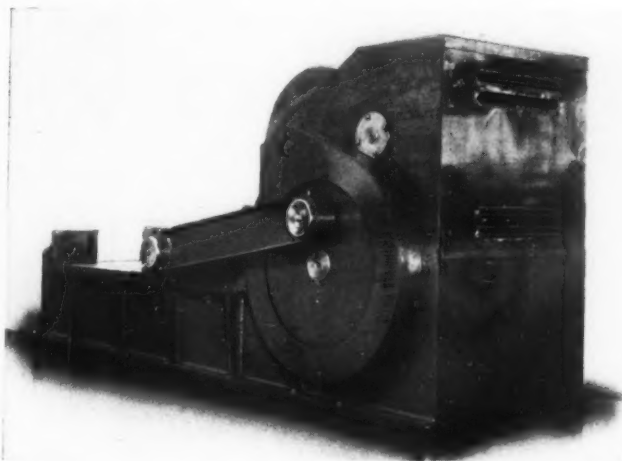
Welded enclosures over mechanisms enhance the appearance of production machinery
